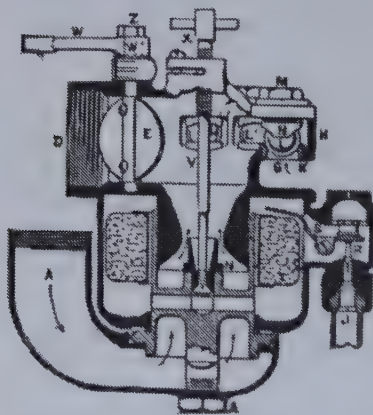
The Kingston carburetor concentric type of float. In this type the gasoline valve R is closed by the upward movement of the concentric float. The adjustable needle V determines the size of the spray jet opening.
